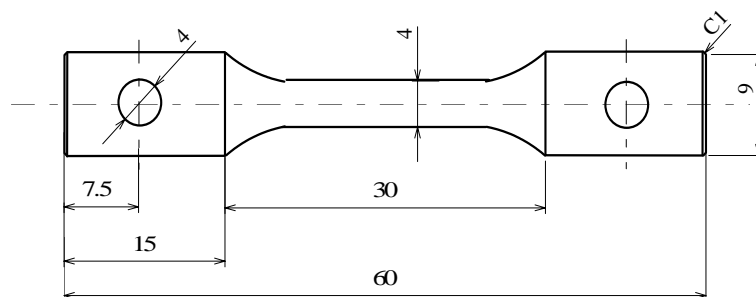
Shape and dimensions of the specimen for tensile test.
